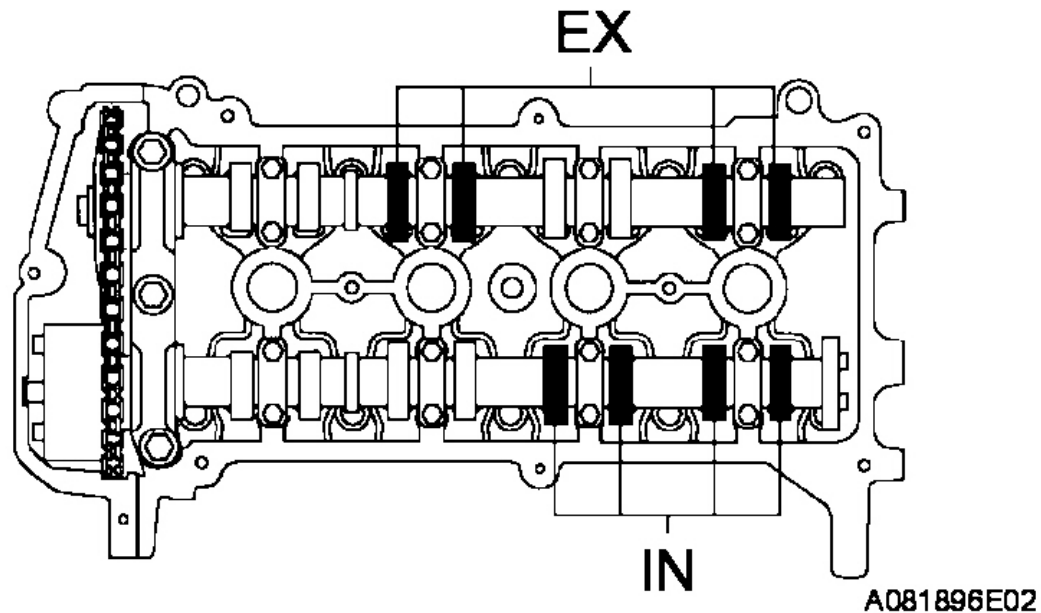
Identifying Valves For Measuring Clearance (No 4 Cylinder TDC/Compression)
